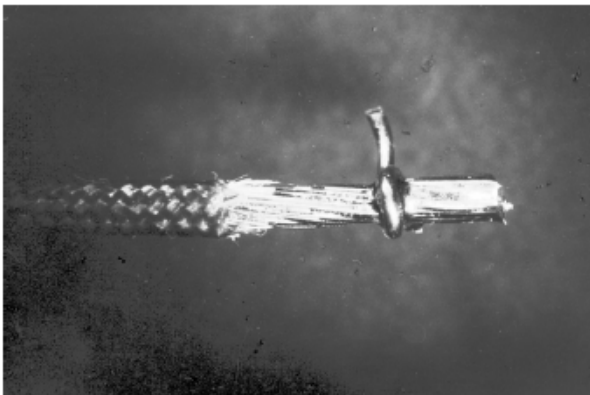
Illustration of Acceptable Solderable Stranded Wire
